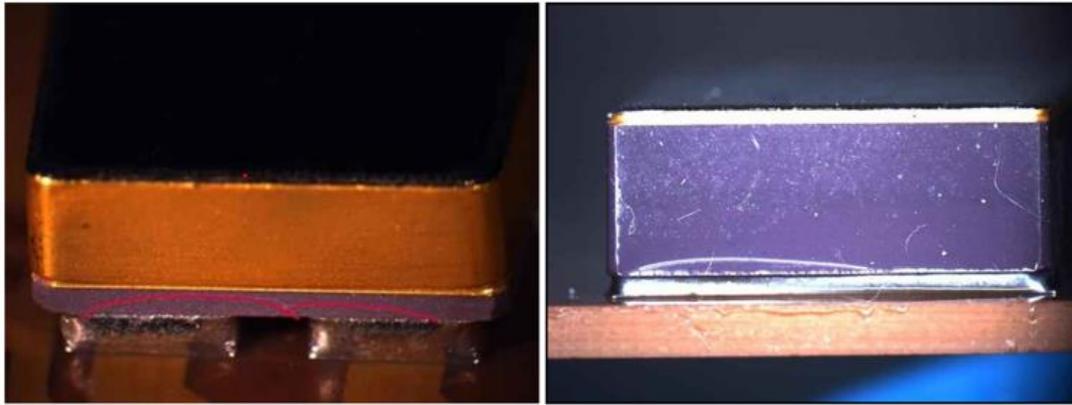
Stress fractures of SMD packages mounted on PCBs.
